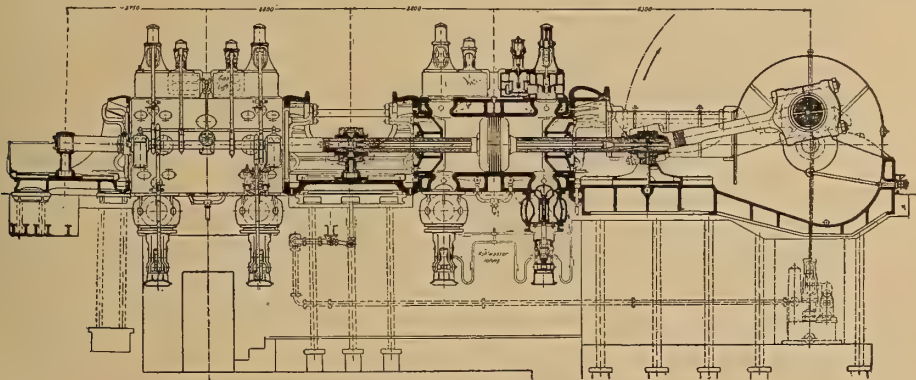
LONGITUDINAL SECTION OF A NÜRNBERG TANDEM ENGINE
